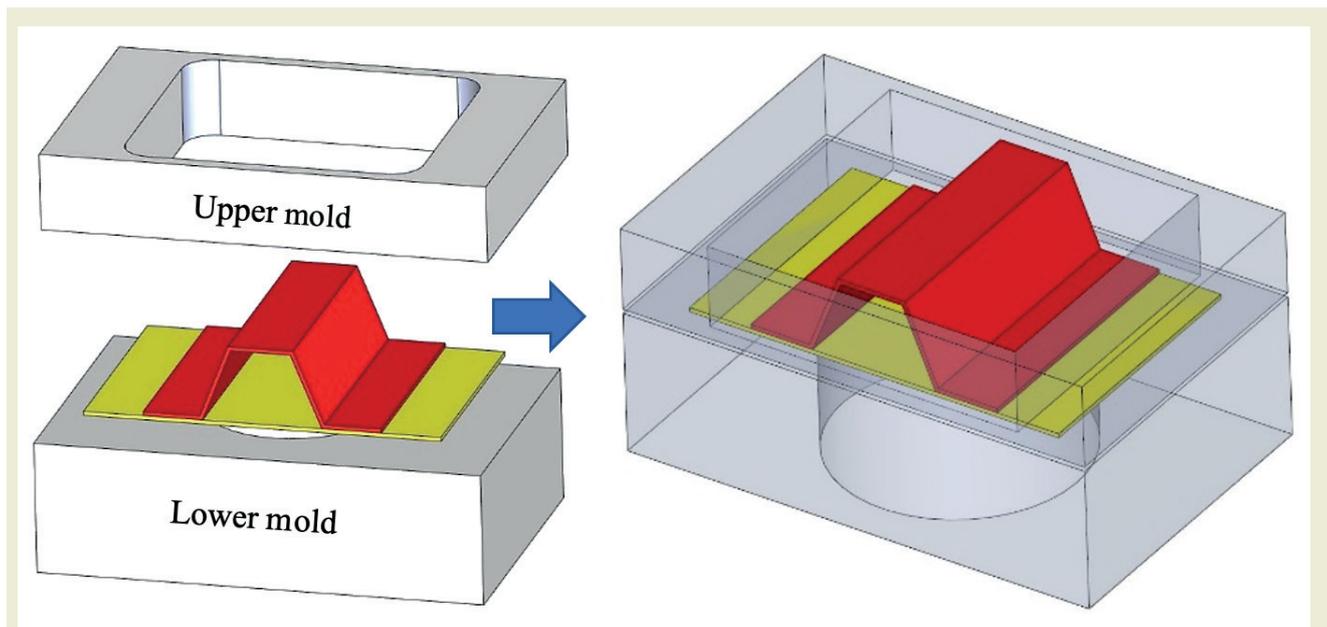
Molds designed to fix the composite panel on the impact test analysis.
